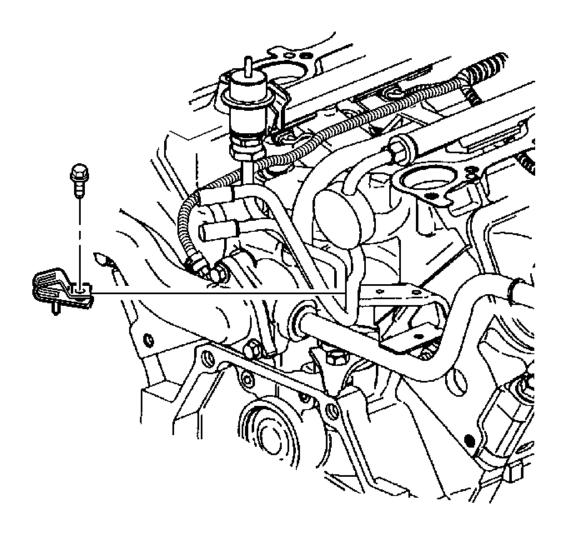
Removing Fuel Feed & Return Pipe Retaining Clip Courtesy of GENERAL MOTORS CORP.
